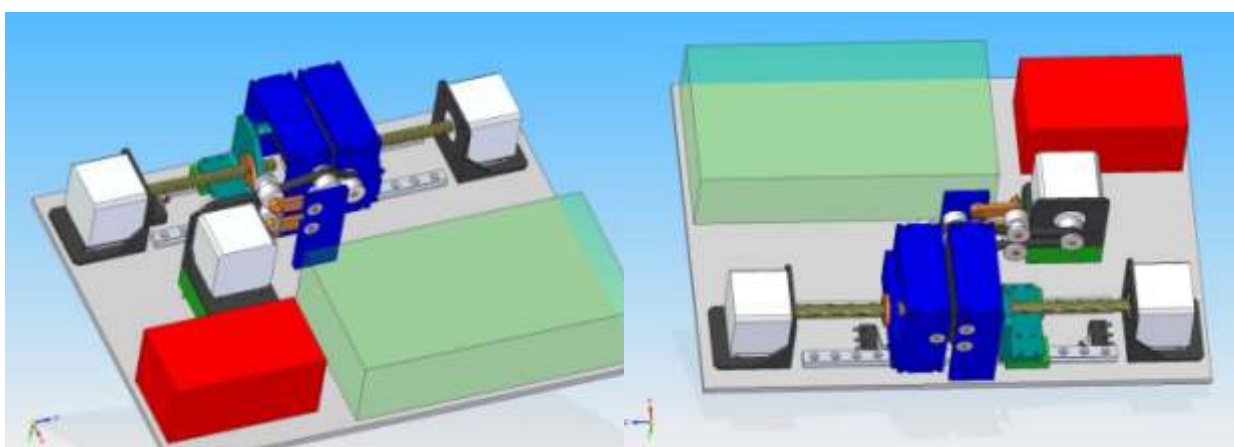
CAD model of the surface preparation tool for UC4: back view (a) and front view (b).
